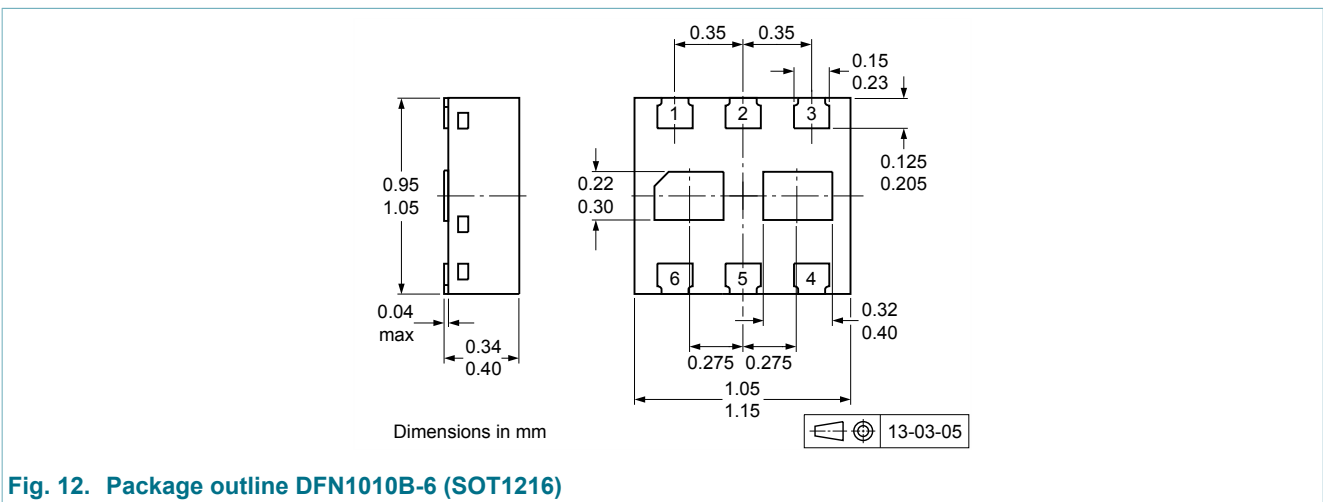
Package outline DFN1010B-6 (SOT1216)
